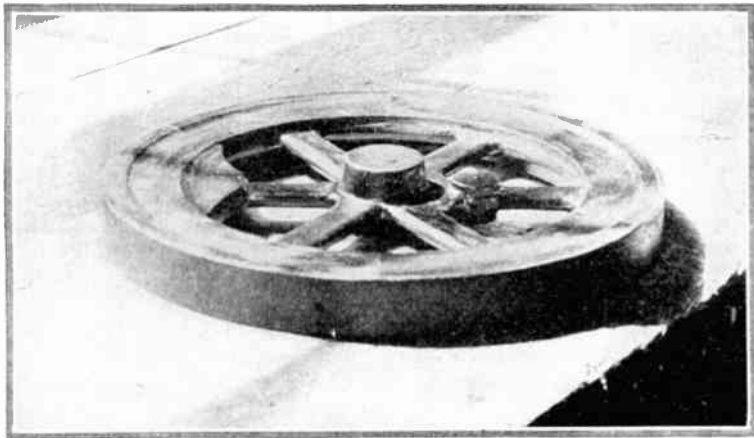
The flywheel is best built up of segments of wood to prevent warping.
